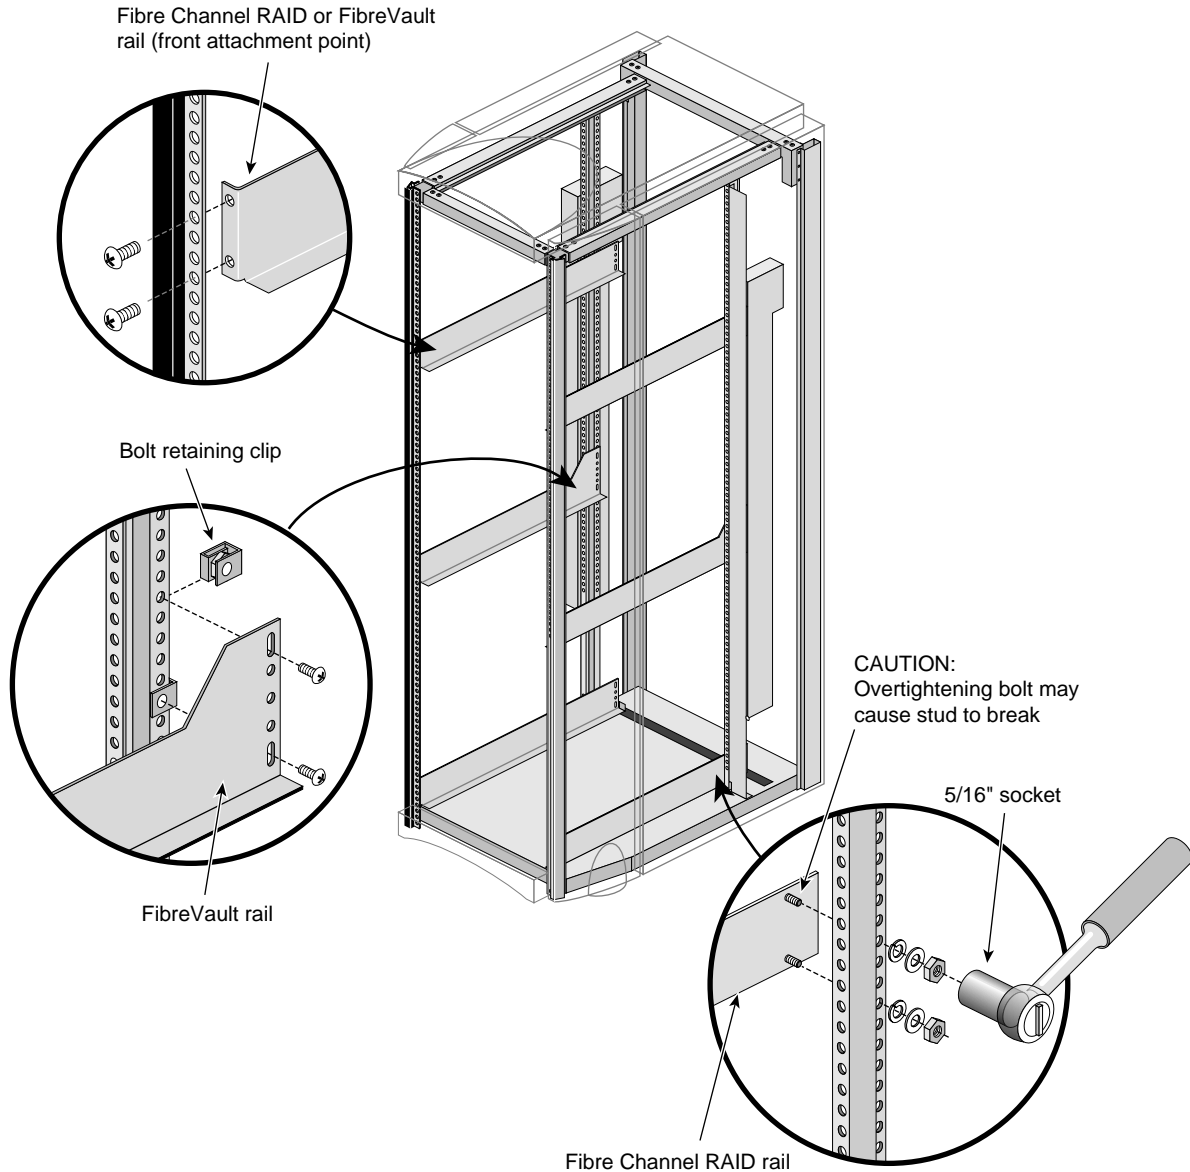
Mounting the Rails in the Fibre Channel Rack
